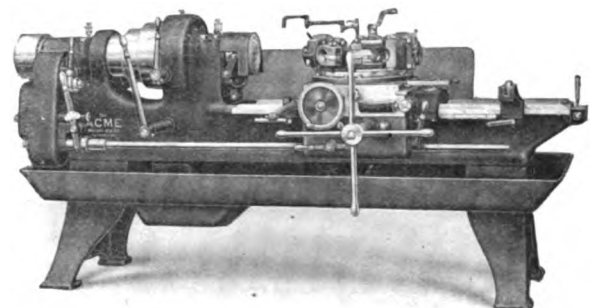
2¼x26 Inch (57x660 mm.) Flat Turret Lathe With Bar Equipment
